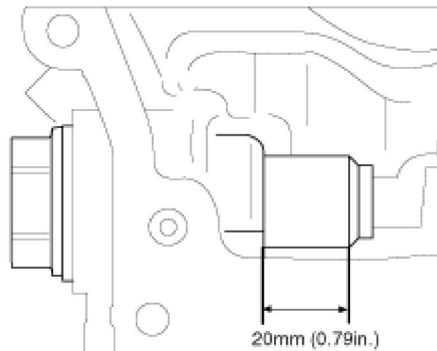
Identifying Distance Between Cylinder Head Surface & End Of Tensioner Plunger (2 Of 2)
